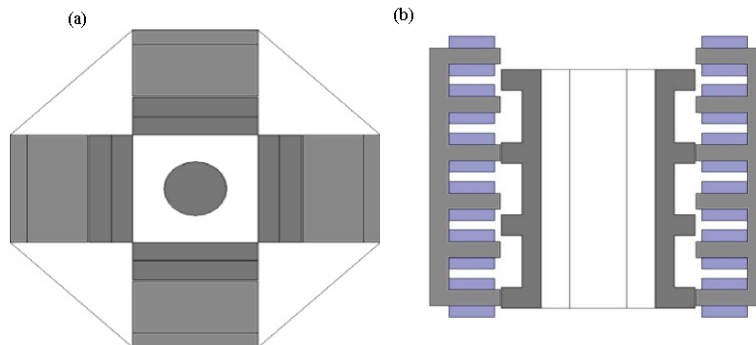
Linear generator design: a) Transverse cross section and b) Longitudinal cross section
